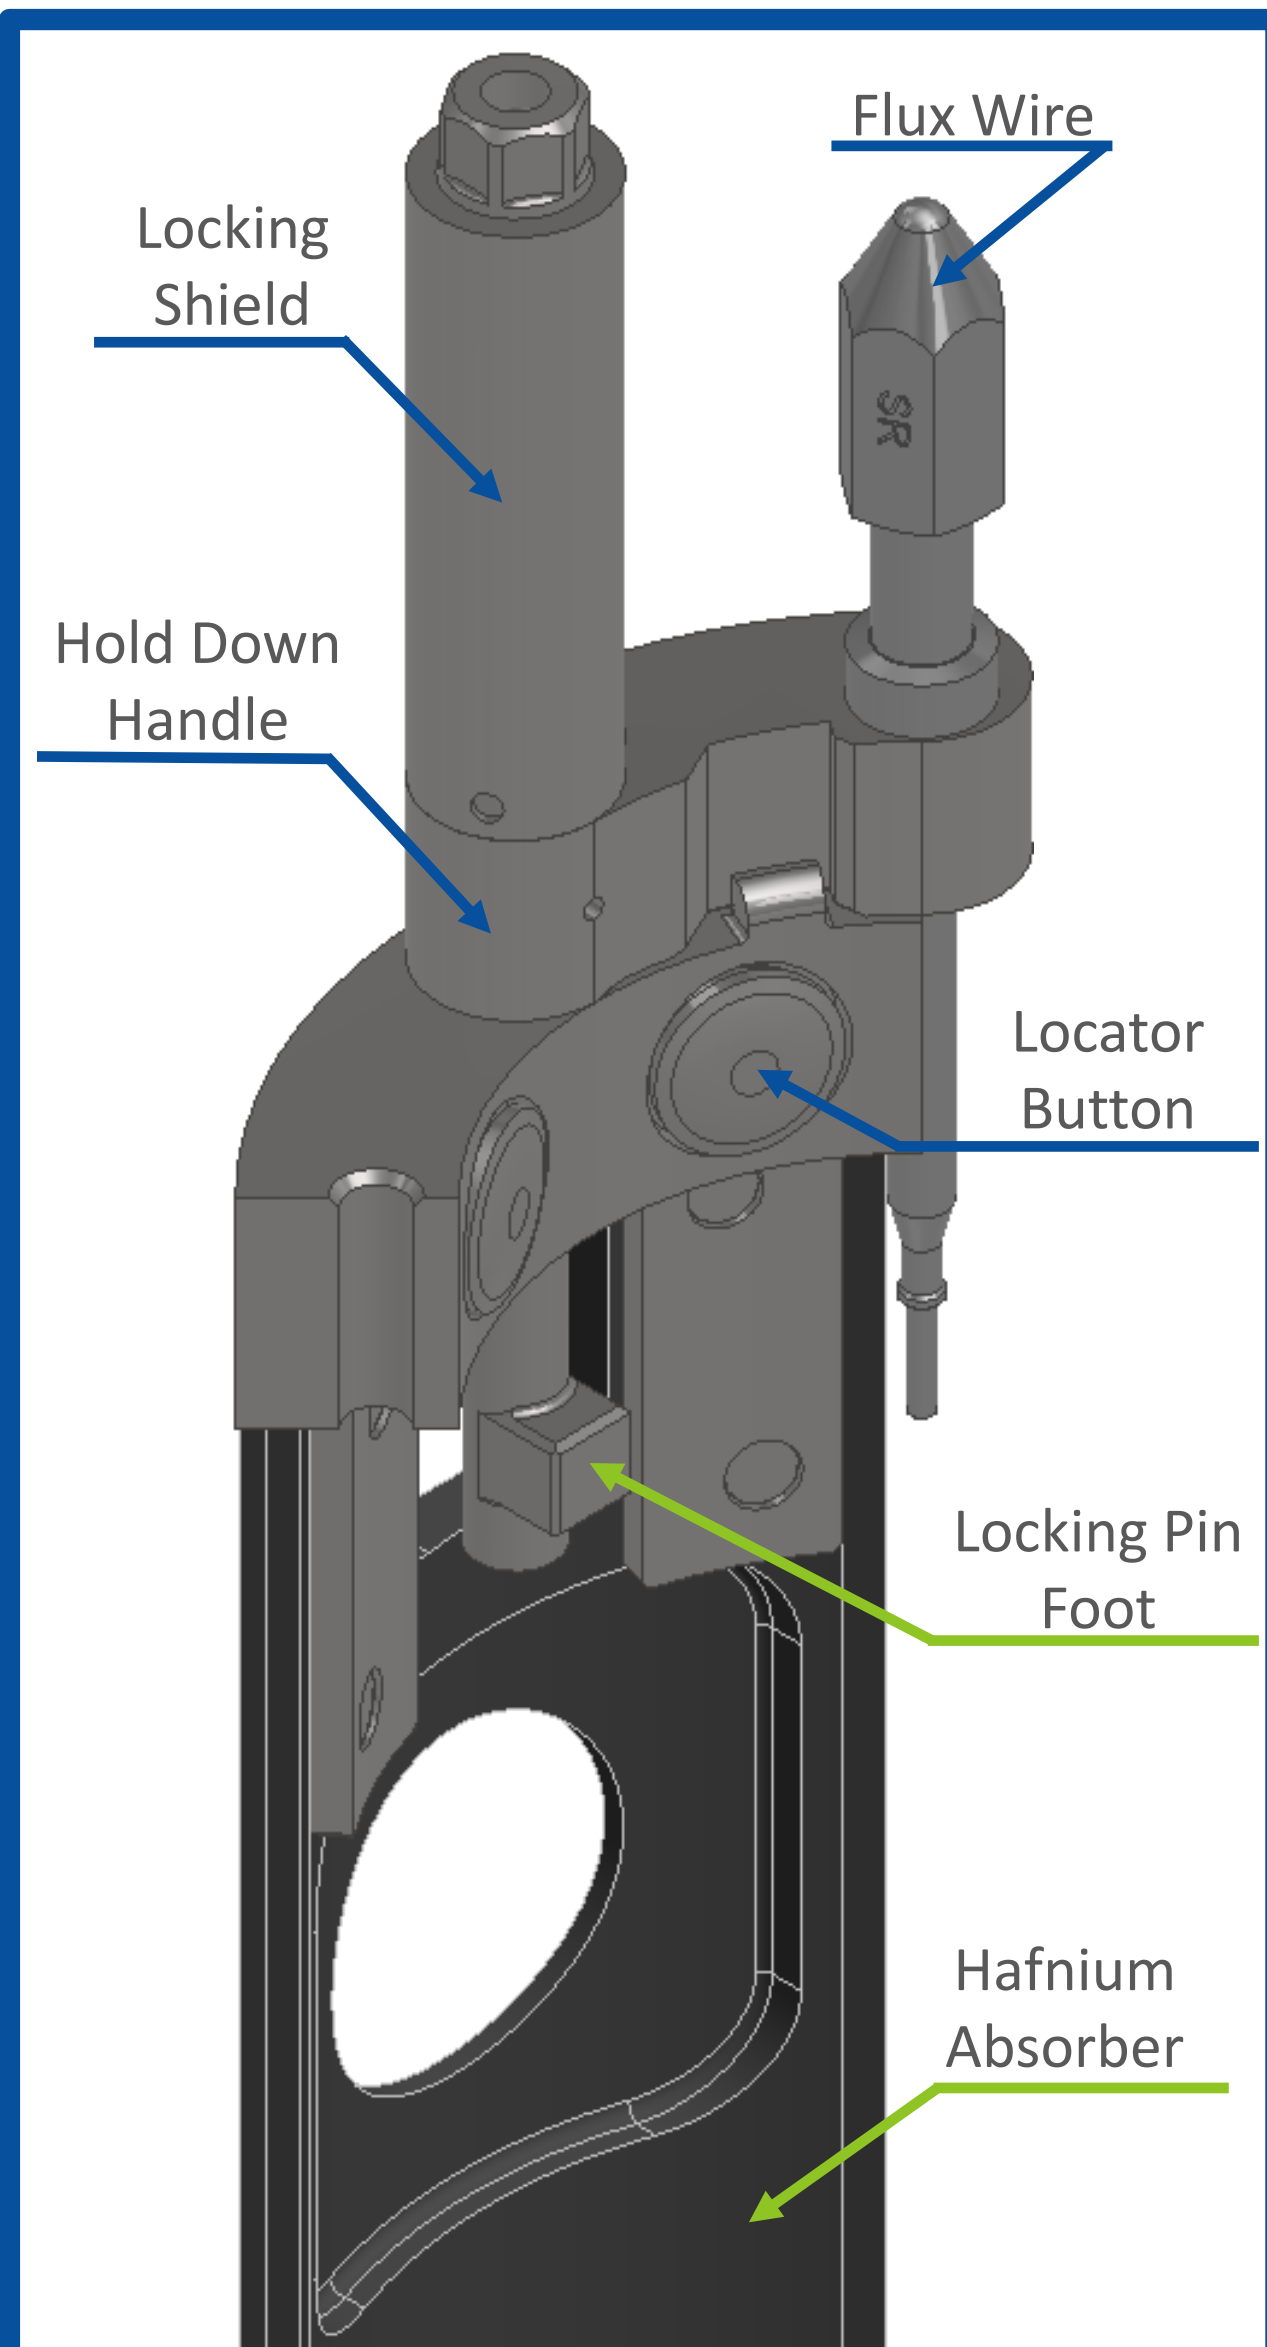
Inventor assembly view of updated hafnium absorber latching mechanism with hafnium shielding attached.
